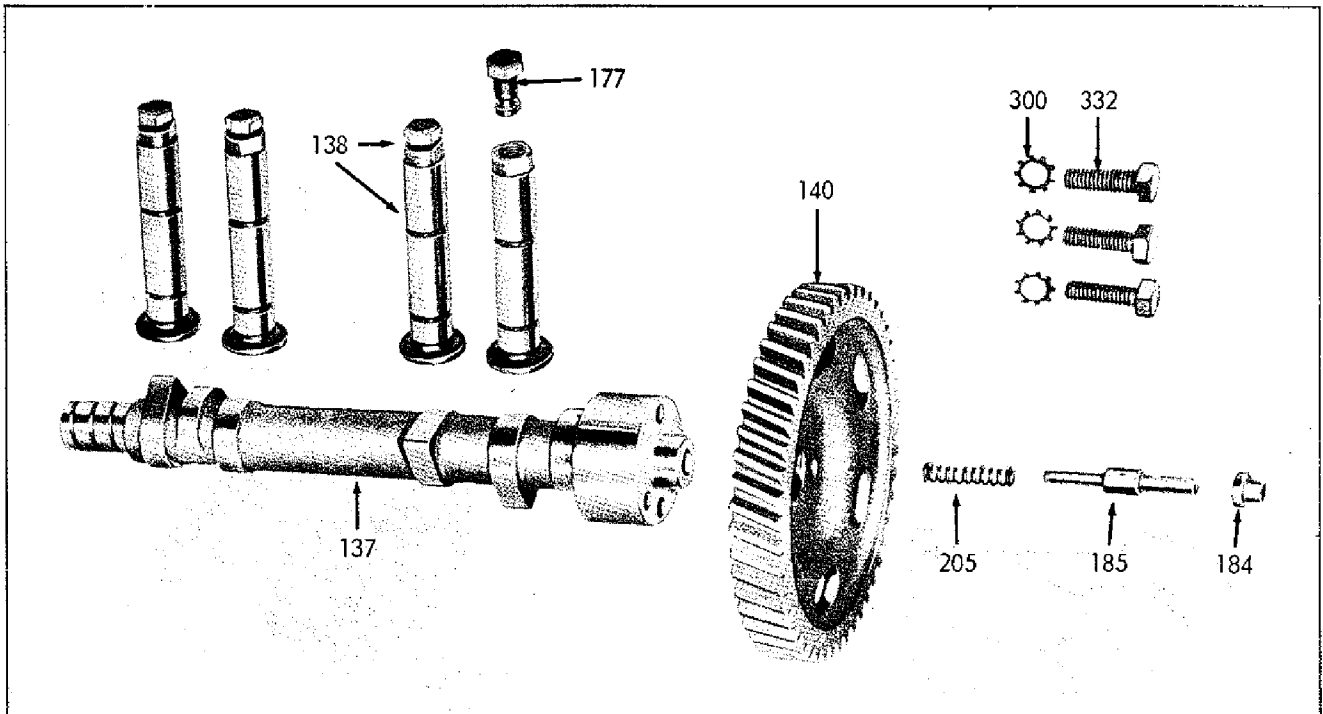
, CAMSHAFT AND VALVE TAPPET GROUP
